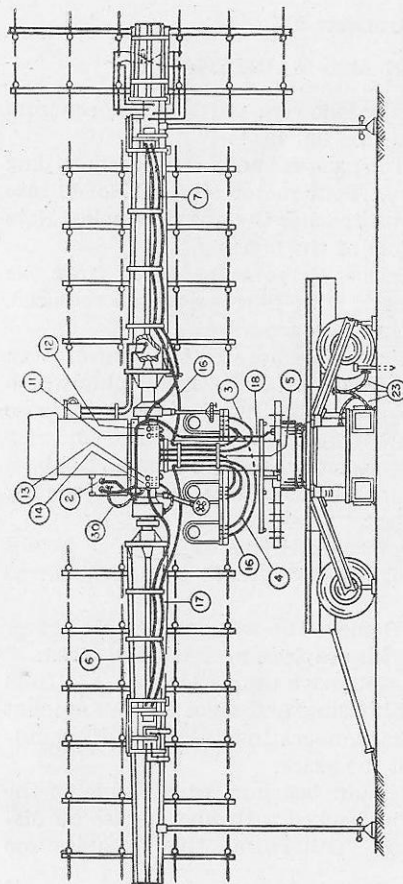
Cable connections on mount. (Numbers on drawing correspond to cable tags.)
